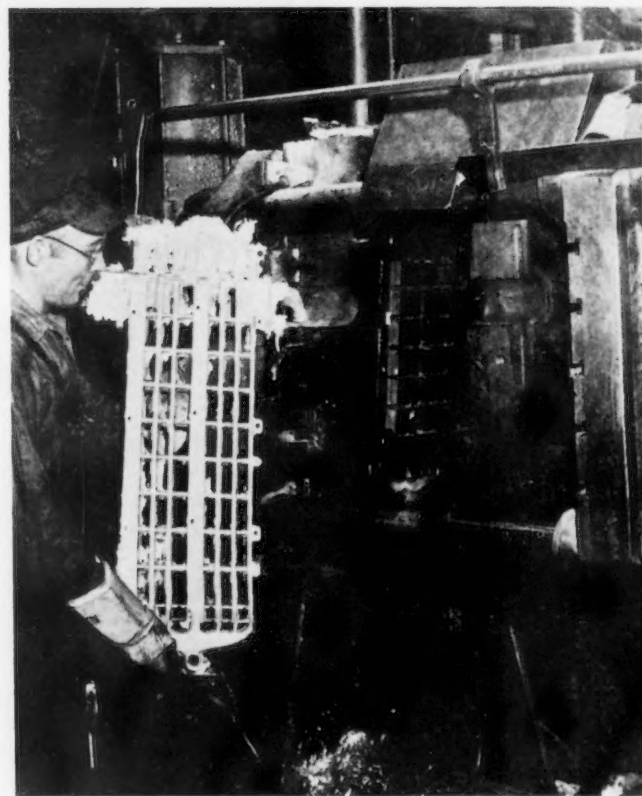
One of the largest casting dies in the plant and the grille produced in the die. Die in background is in the open position.
